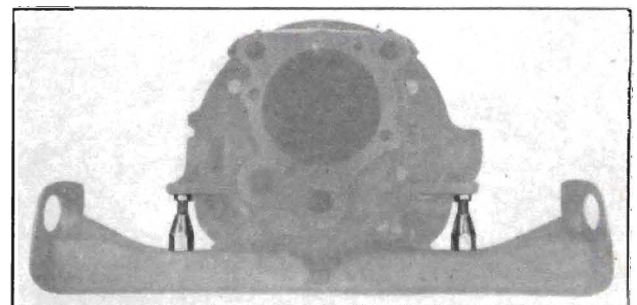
Engine Jacks (Tool J-1580) in Position
